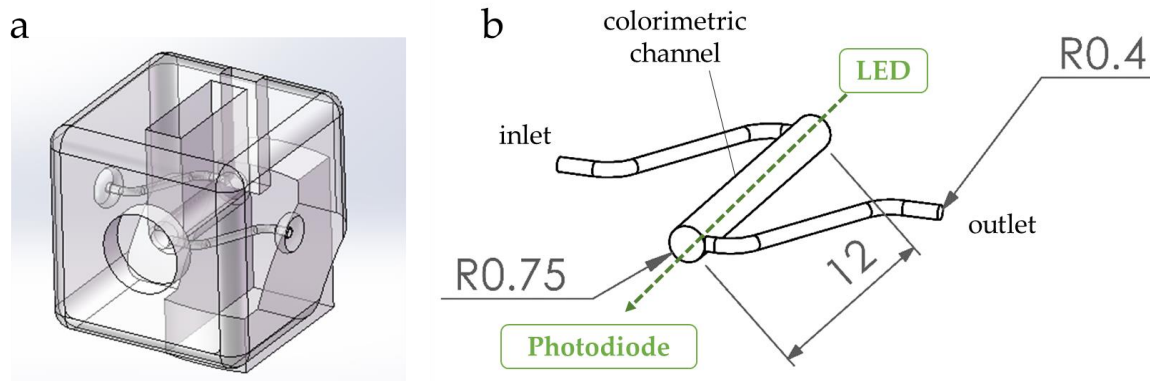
Dimensions of the colorimetric module. (a). A transparent illustration of the colorimetric module frame (without black epoxy resin, LED, and photodiode). (b). Geometry and dimensions of the actual fluid channel inside the module. Unit:mm.
